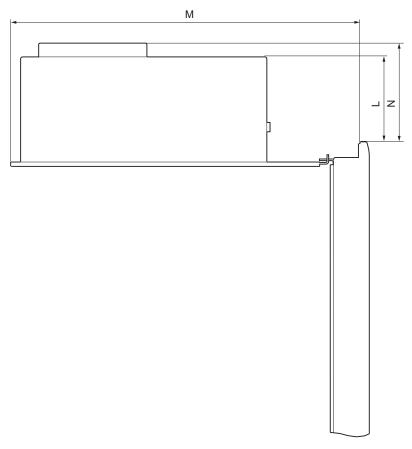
Dimension drawing IPC, computer unit swung away from control unit
